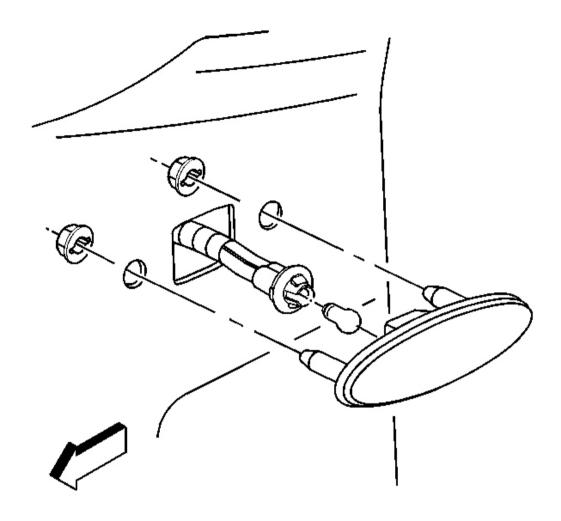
Front Side Repeater Lamp Socket To Front Side Repeater Lamp Assembly Courtesy of GENERAL MOTORS CORP.
